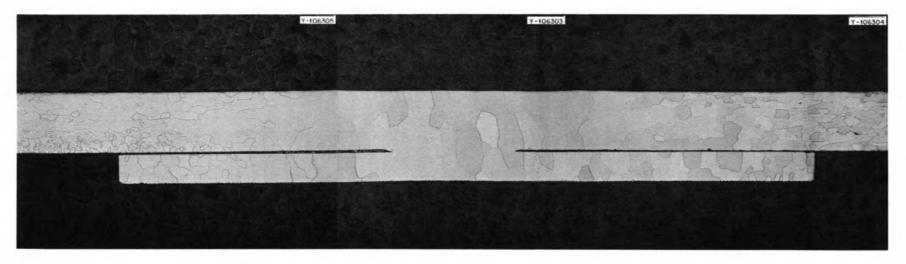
Cross section through an orbiting-arc field weld joining two 0.250-in.-OD, 0.020-in.-wall tubes. Etchant: 50 vol % NH₄OH-50 vol % H₂O₂. $50\times$.
